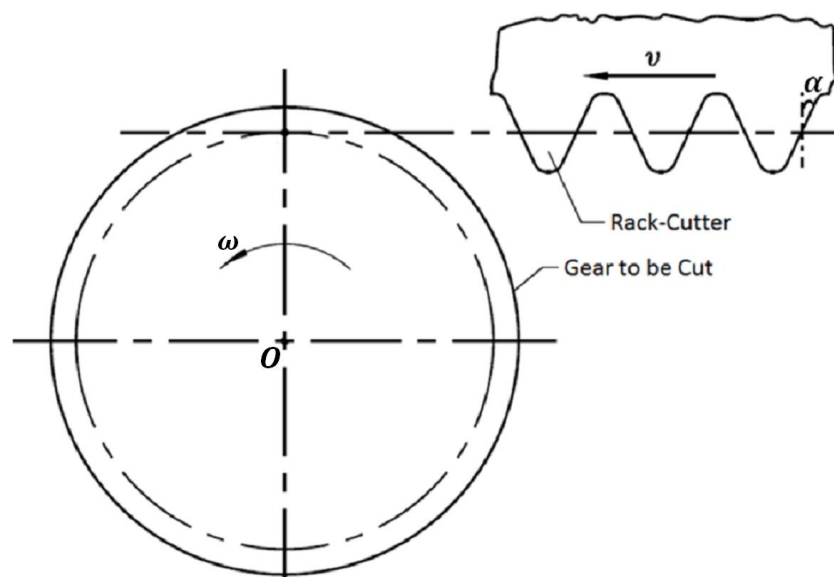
Basic visualization of external spur gear generation by a rack-cutter
